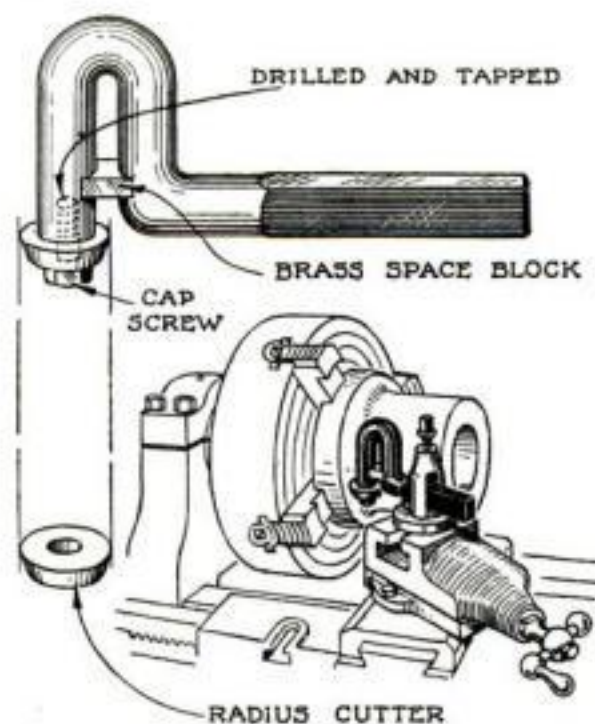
Fillet cutter and gooseneck holder, and how they are used in machining radii.
